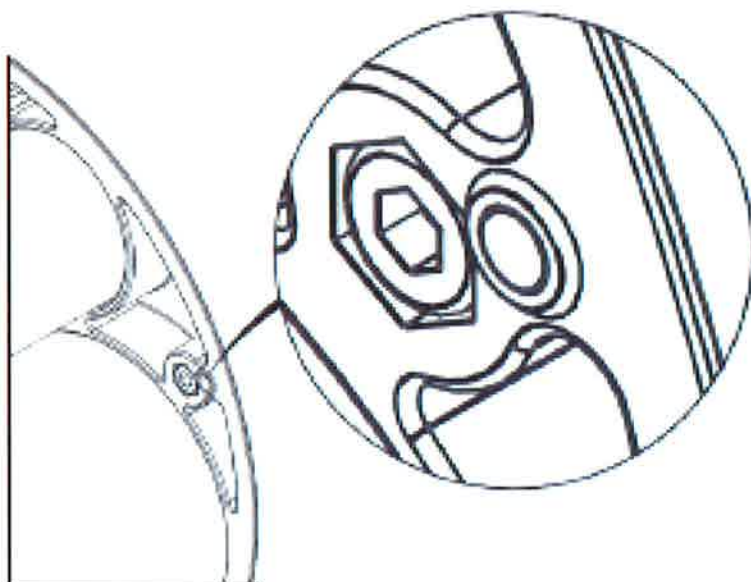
Detail of the control pins which are flush with the front panel of MSH-FW outer sealing element module 1 (picture of the manufacturer).
